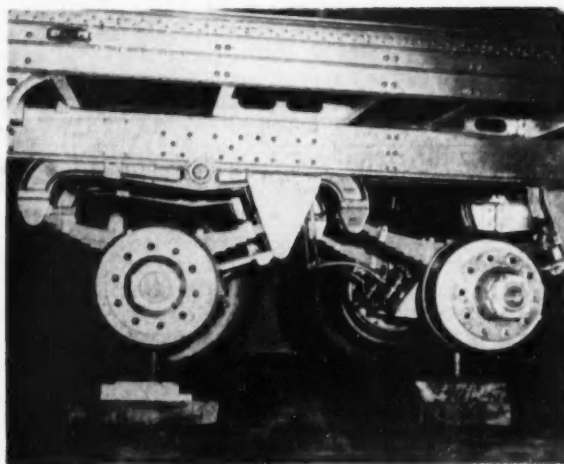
An all-aluminum tandem axle truck trailer suspension which requires no lubrication. Large aluminum equalizer beam is pivoted on rubber. Heat treated aluminum spring hanger castings have aluminum sprayed cast steel spring pockets cast integrally
